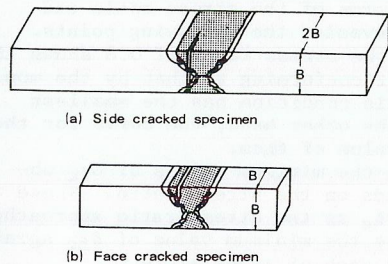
Specimens for the CTOD tests for welded joints
